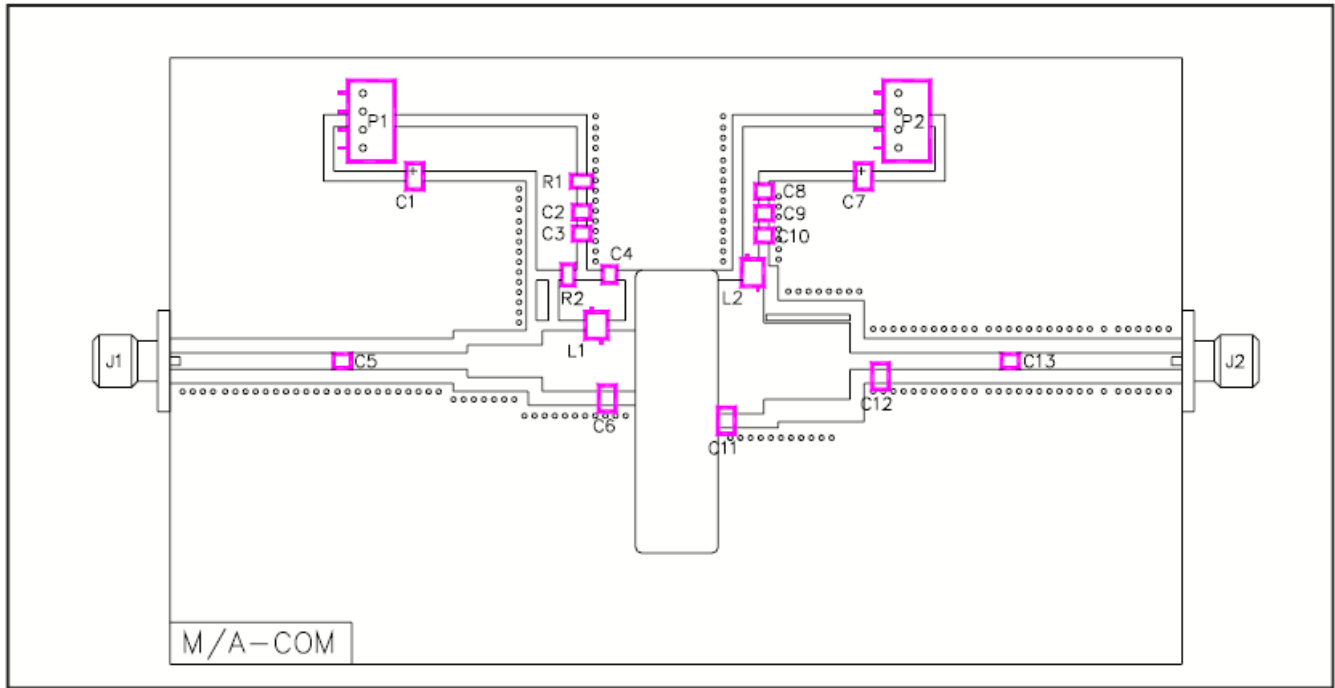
1620—1670 MHz TEST FIXTURE COMPONENT LAYOUT
